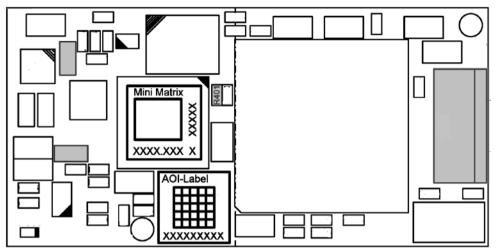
Dimensioned Device Drawing NIC 52-RE (top side)
